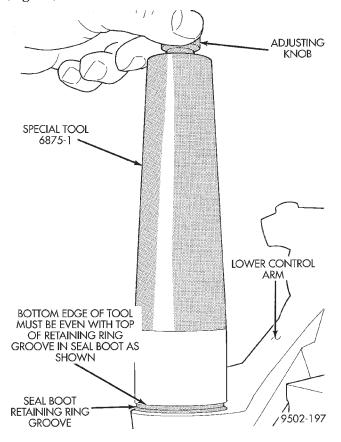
Correctly Installed Ball Joint Seal Retaining Ring Tool
